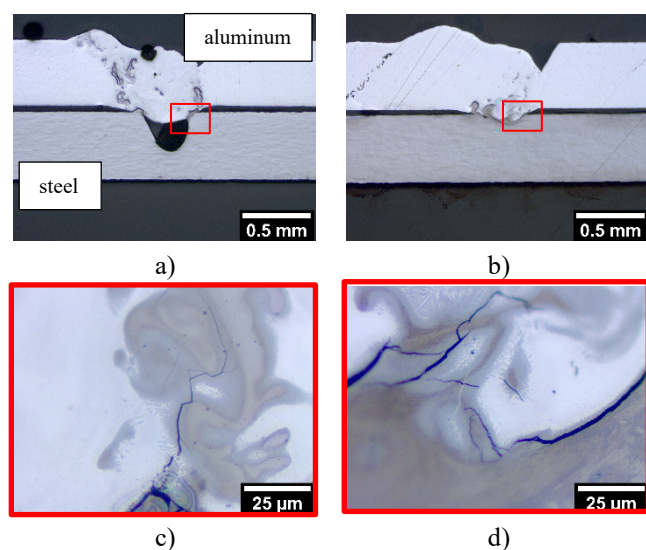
aluminum steel welds (a) without power control; (b) with power control.
